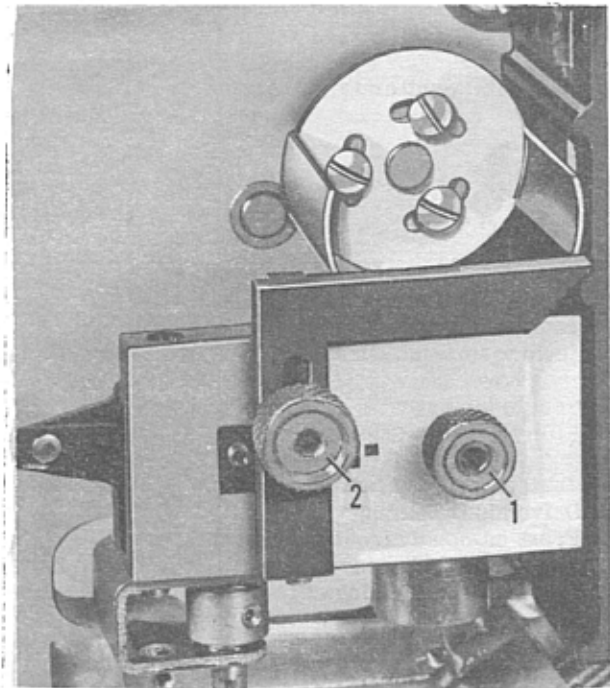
Synchronizing the Shutter and Intermittent Mechanism
